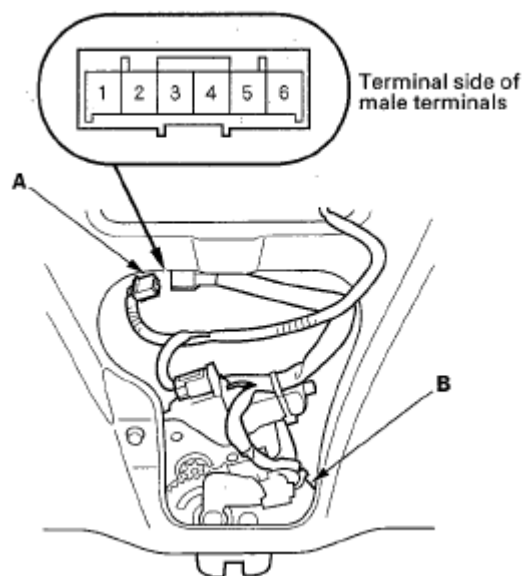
Identifying 6P Connector And Tailgate Closer Unit
